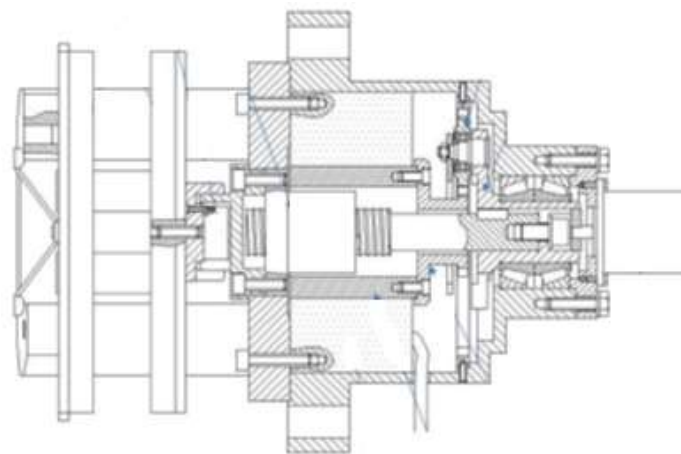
Electromechanical brake caliper using Brushless DC motor [2]
